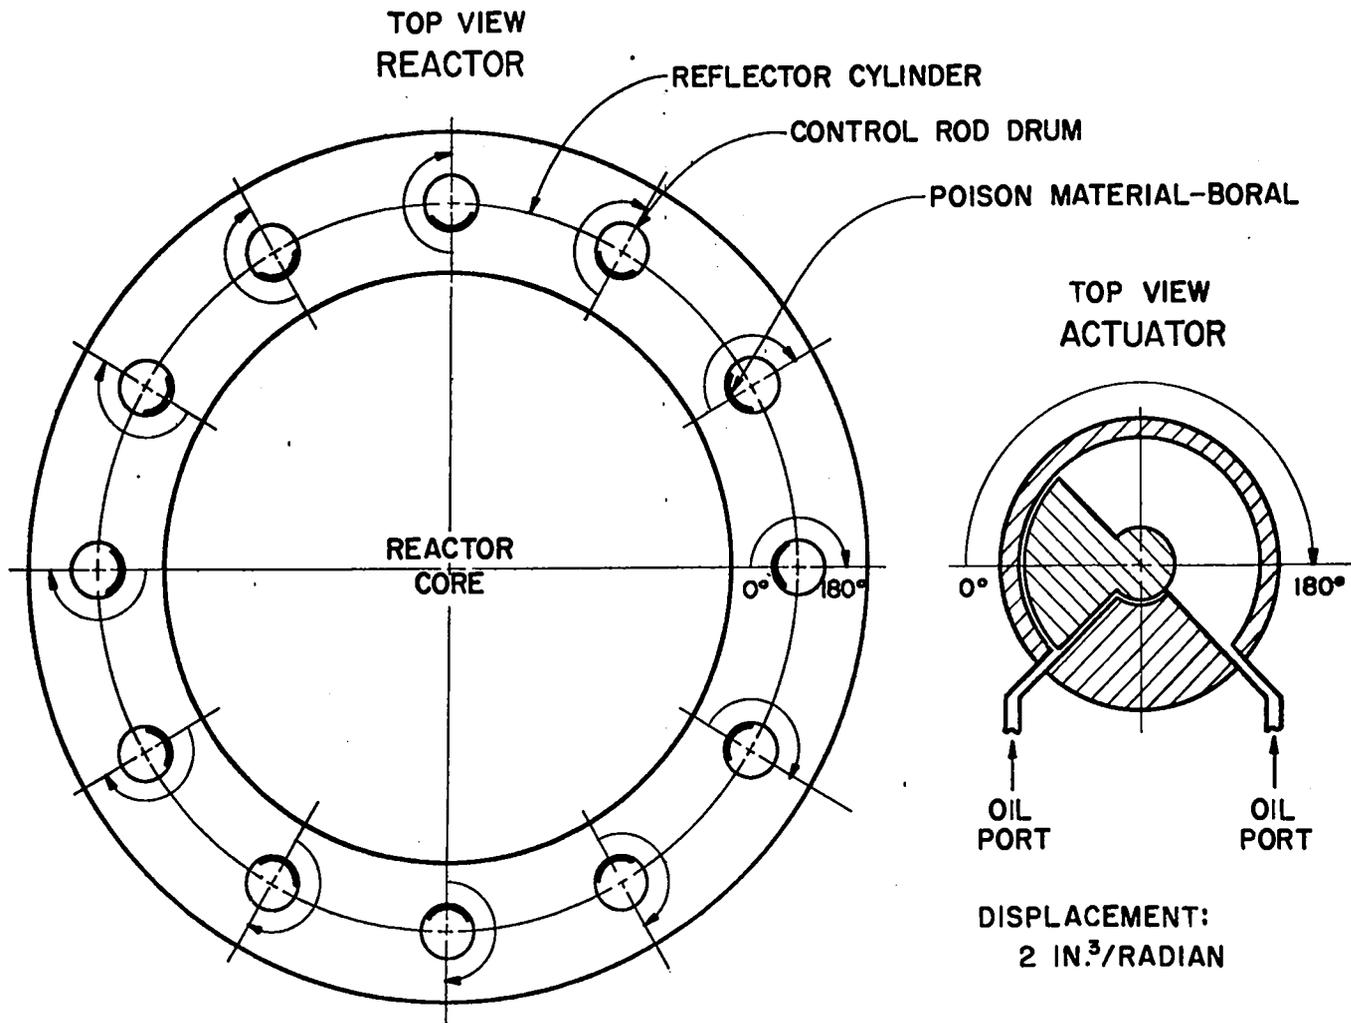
Twelve Control Rod Drum Layout Schematic
